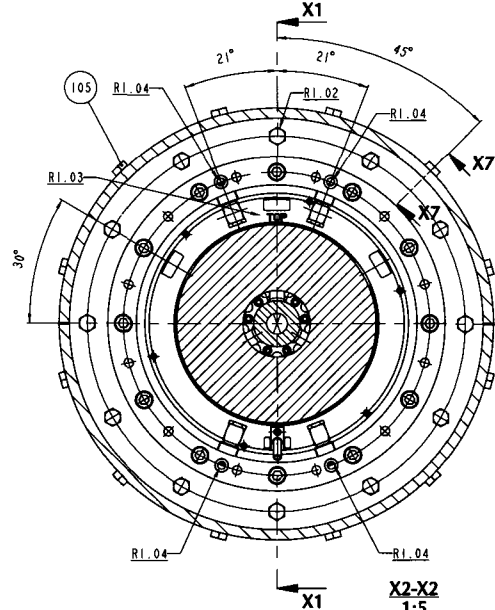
PLATE NO		PROD IDENT	STERNTUBE, COUPLING FLANGE, INTERNAL SEAL
